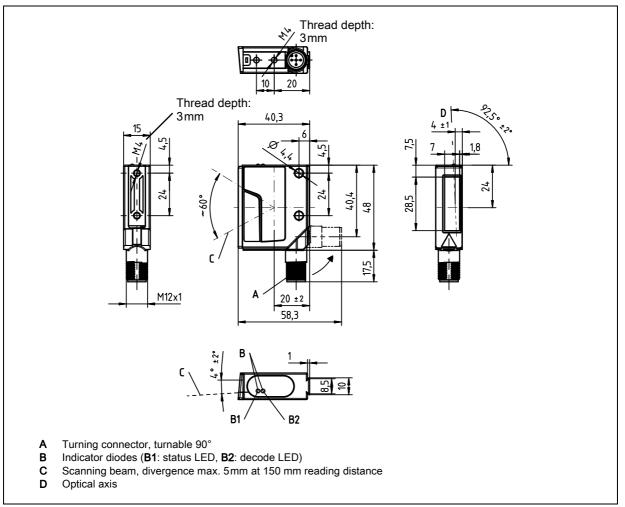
BPS 8 SM 102... dimensioned drawing
